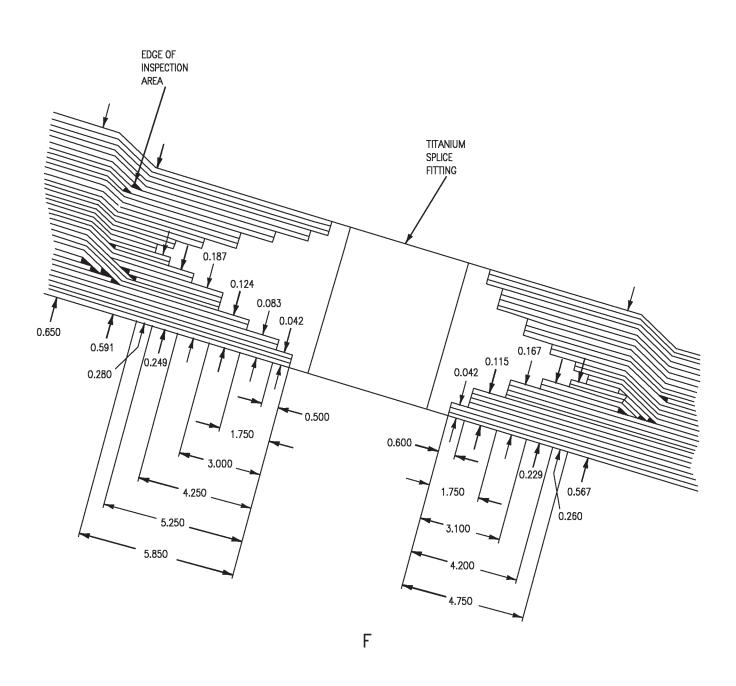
Inner Wing Lower Surface Titanium Splice Fitting Inspection Areas (Sheet 5)
